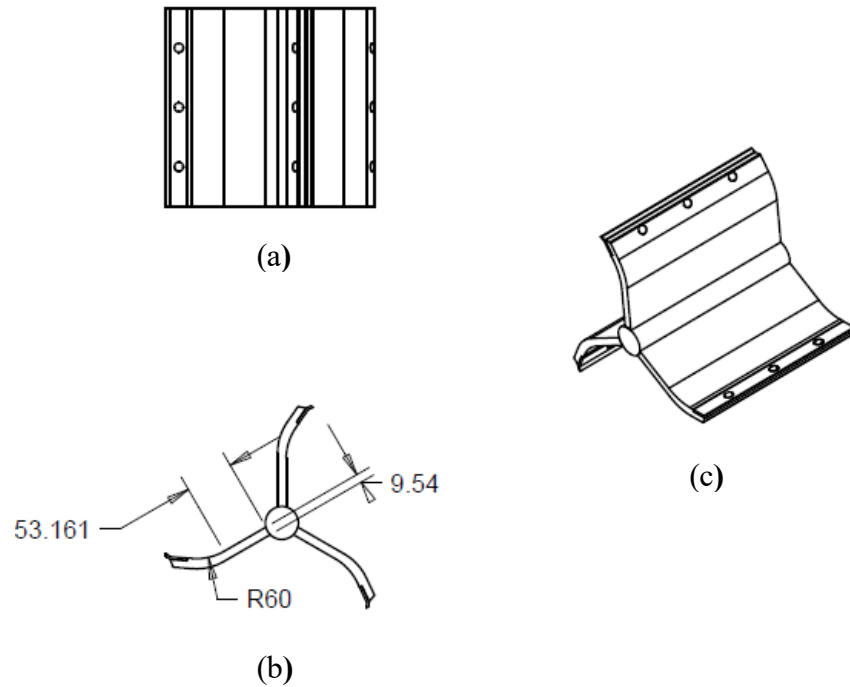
Cutting Blade Holder (a) Top view, (b) Front view and (c) Isometric view
